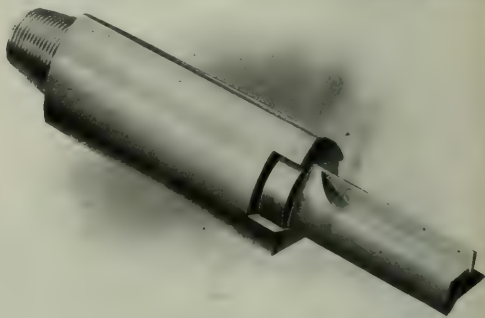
Drill, with Sleeve, for Sharp Cornered Holes.
